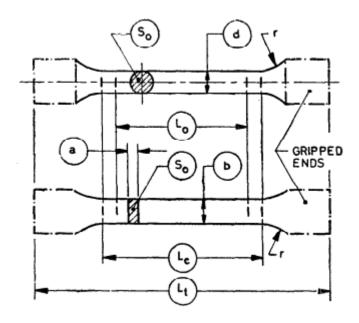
TEST PIECE OF CIRCULAR AND RECTANGULAR CROSS SECTION
